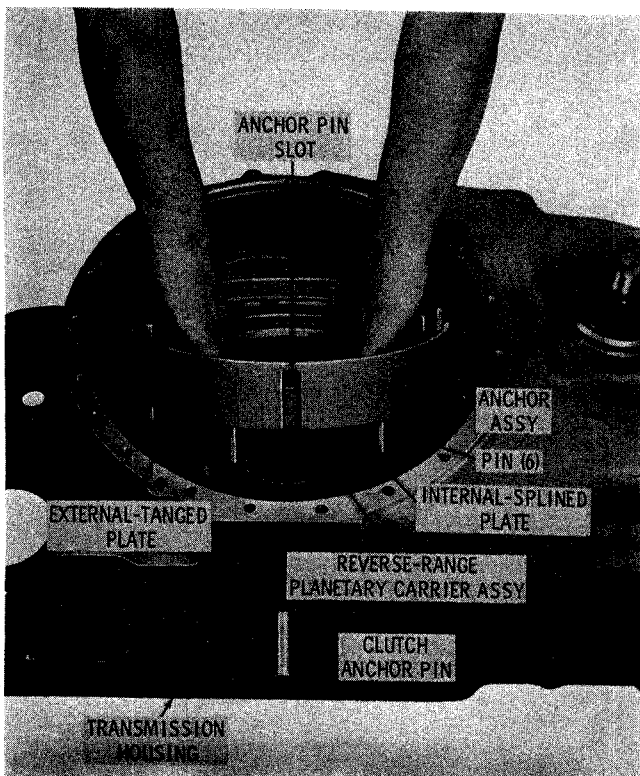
Installing reverse- and low-range clutch anchor assembly
